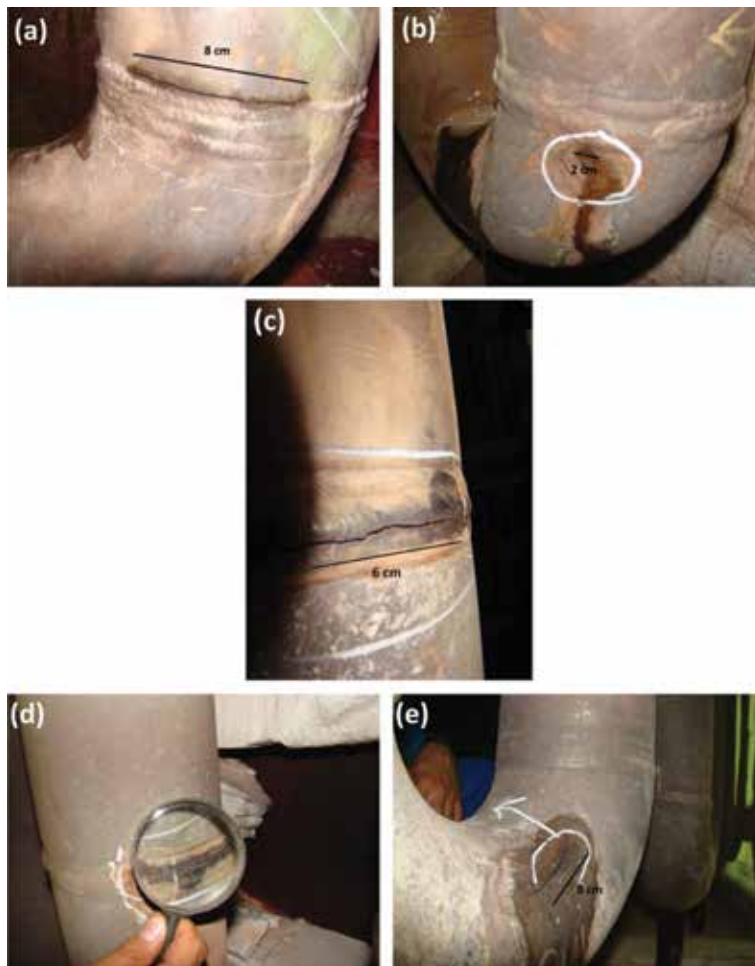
(a and b) Circumferential cracks adjacent to the seam weld, (c and d) circumferential cracks at the ribbon of seam weld, and (e) longitudinal cracks on the U-bend [9].
